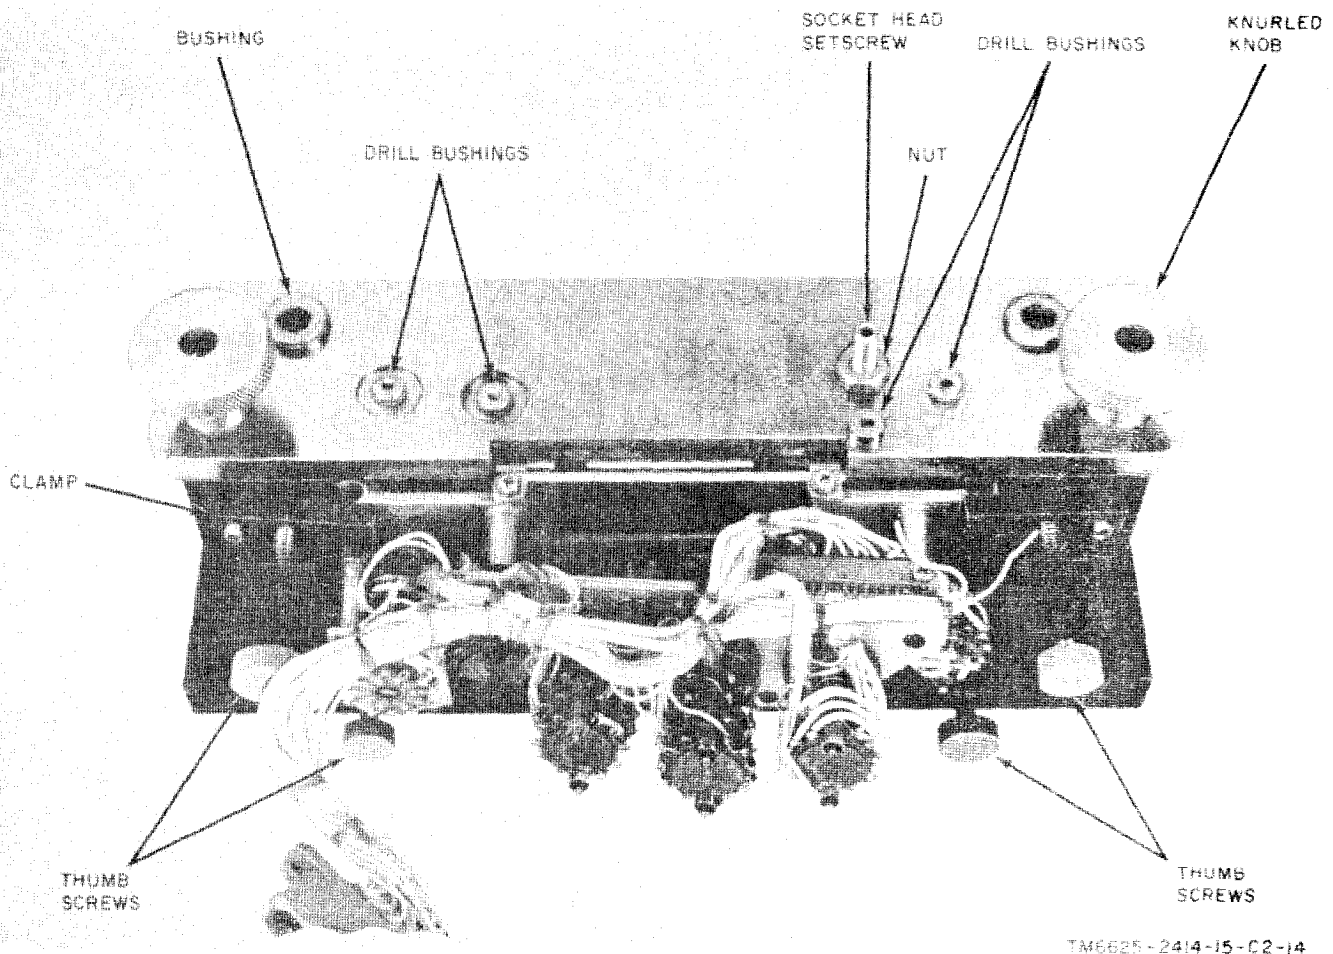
AN/ARC-116 tuning control assembly mounted in support and drill fixture with top plate attached.
